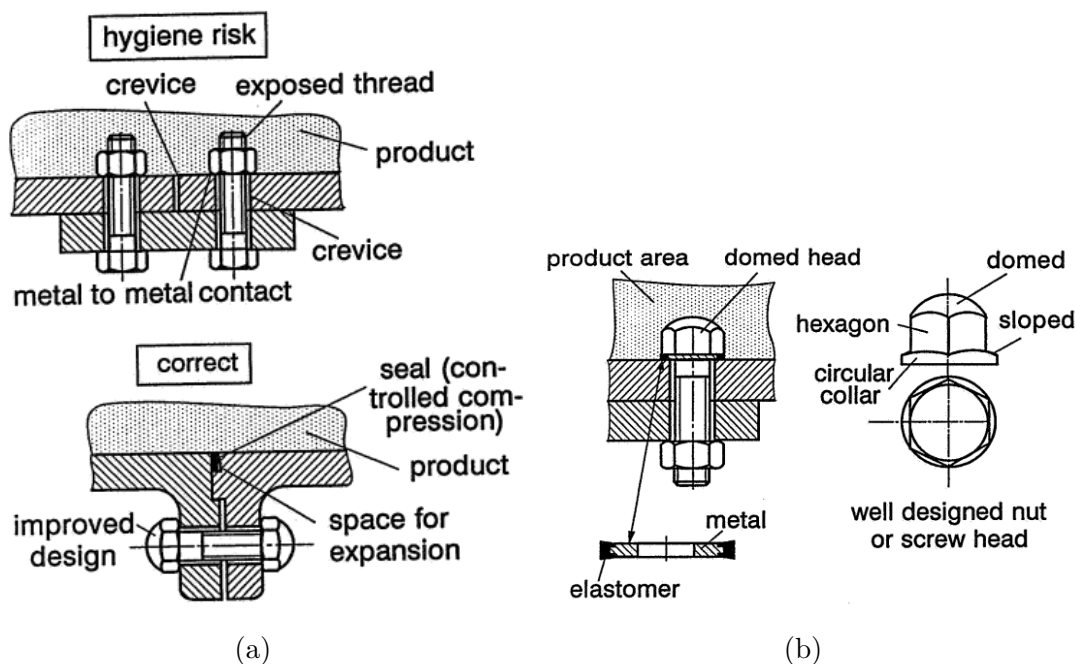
(a) Direct metal-to-metal junctions and exposed screw threading must be avoided; instead, bolts have to be moved outside production area, preventing leakages and contamination with proper sealings. (b) If the use of bolts inside the production area is technically unavoidable, they must be fastened so to expose the screw head, which is to be designed as a domed hexagon and equipped with an underlying dedicated static seal. Adapted from [18].
